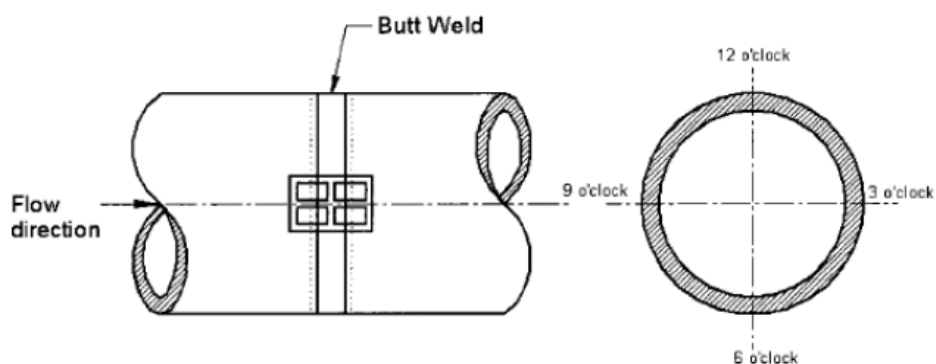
Typical Butt Weld positions to be replicated.
